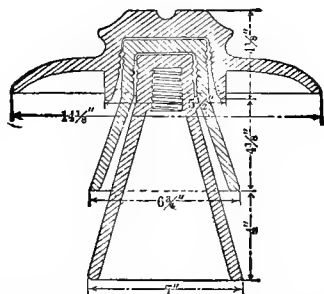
SECTION OF HIGH-TENSION INSULATOR.
